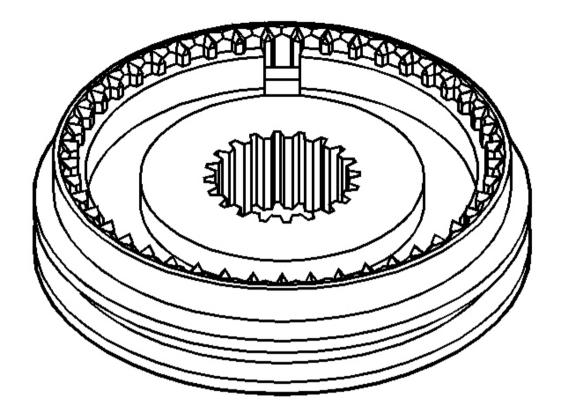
Inspecting Synchronizer Teeth For Damage Courtesy of GENERAL MOTORS CORP.
